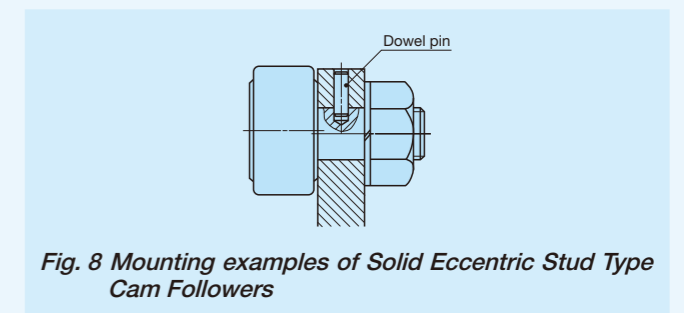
Mounting examples of Solid Eccentric Stud Type Cam Followers
